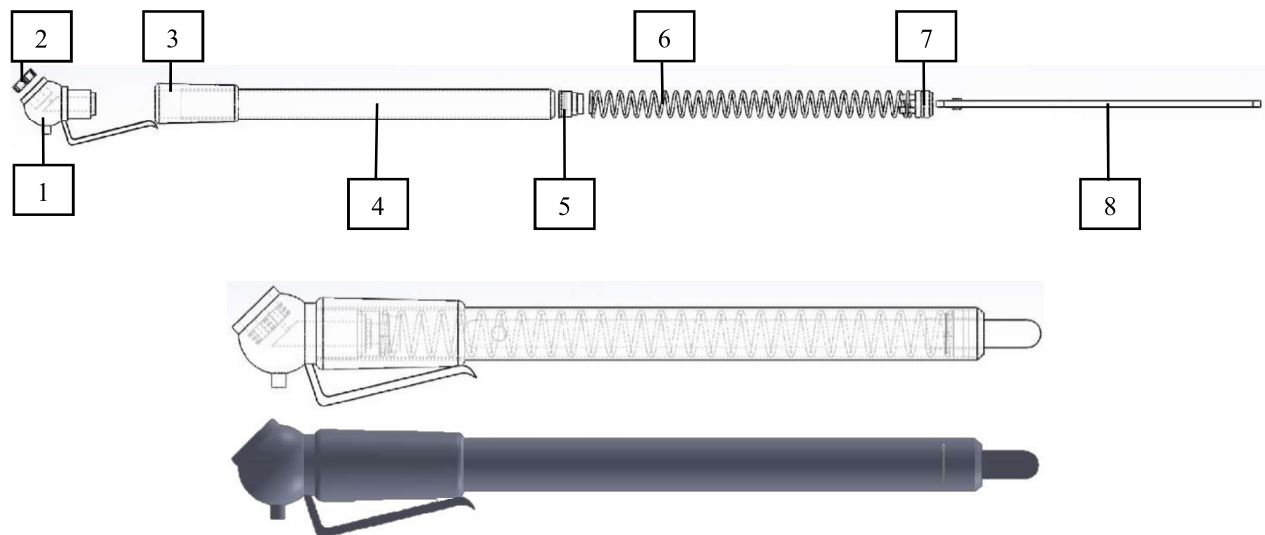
Labeled diagram of a pressure gauge, transparent view of assembled pressure gauge, and external view of assembled pressure gauge.
